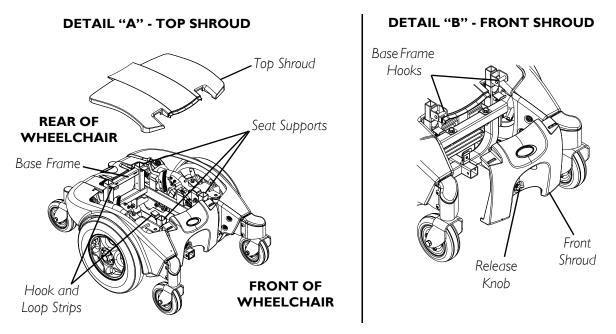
REMOVING/INSTALLING THE SHROUDS
